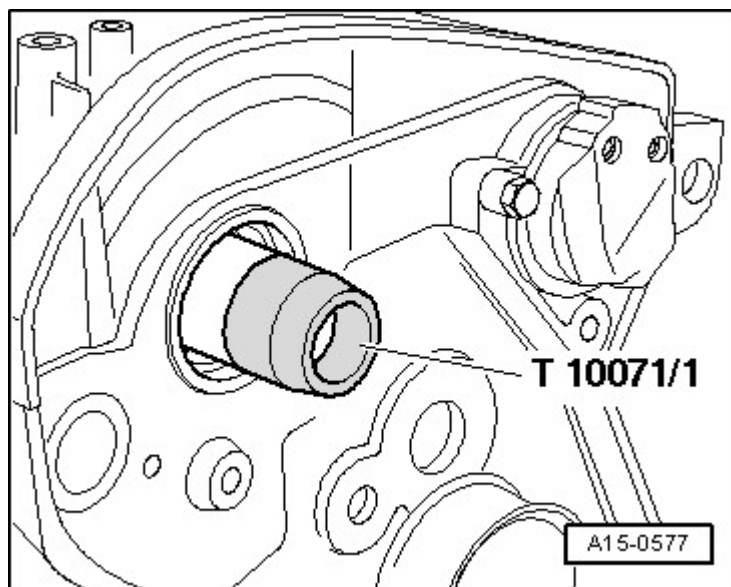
Identifying Guide Sleeve T10071/1 Placed On Camshaft Pin
